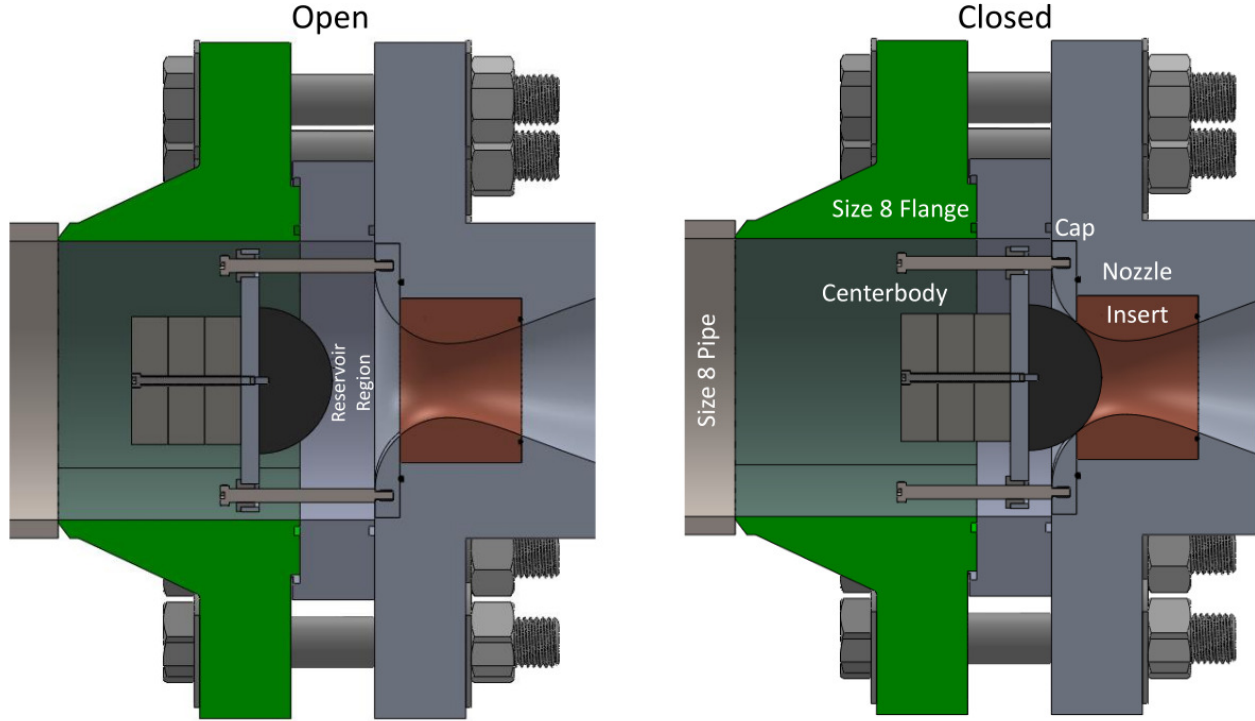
Side View of Centerbody Plugging the Nozzle.
